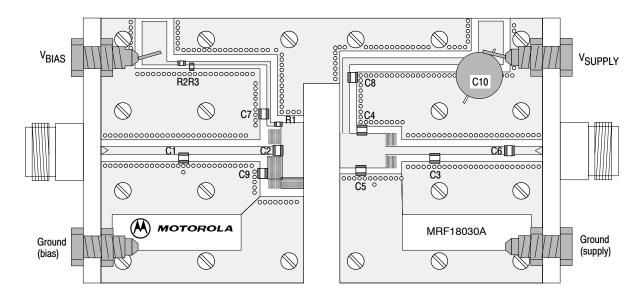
1805 - 1880 MHz Test Fixture Component Layout
